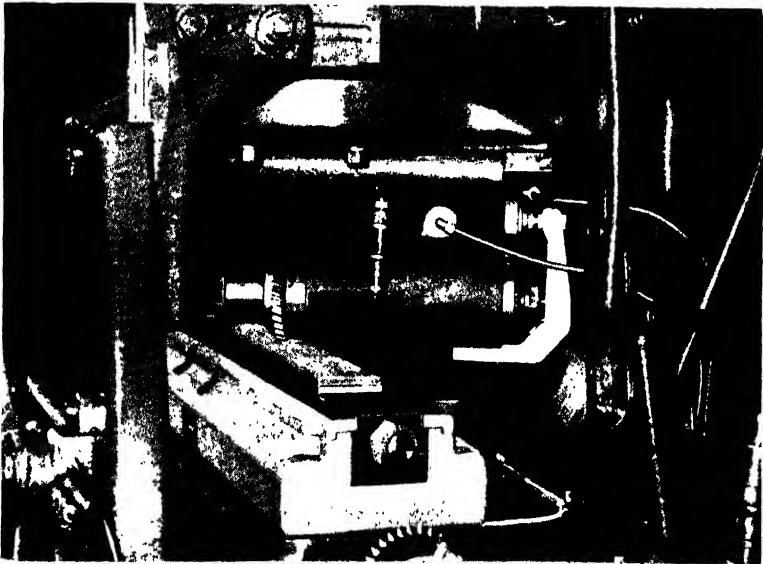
Gear Shaving Machine Equipped with Special Work-head Designed to Eliminate Mounting Flat Gears on Arbors
